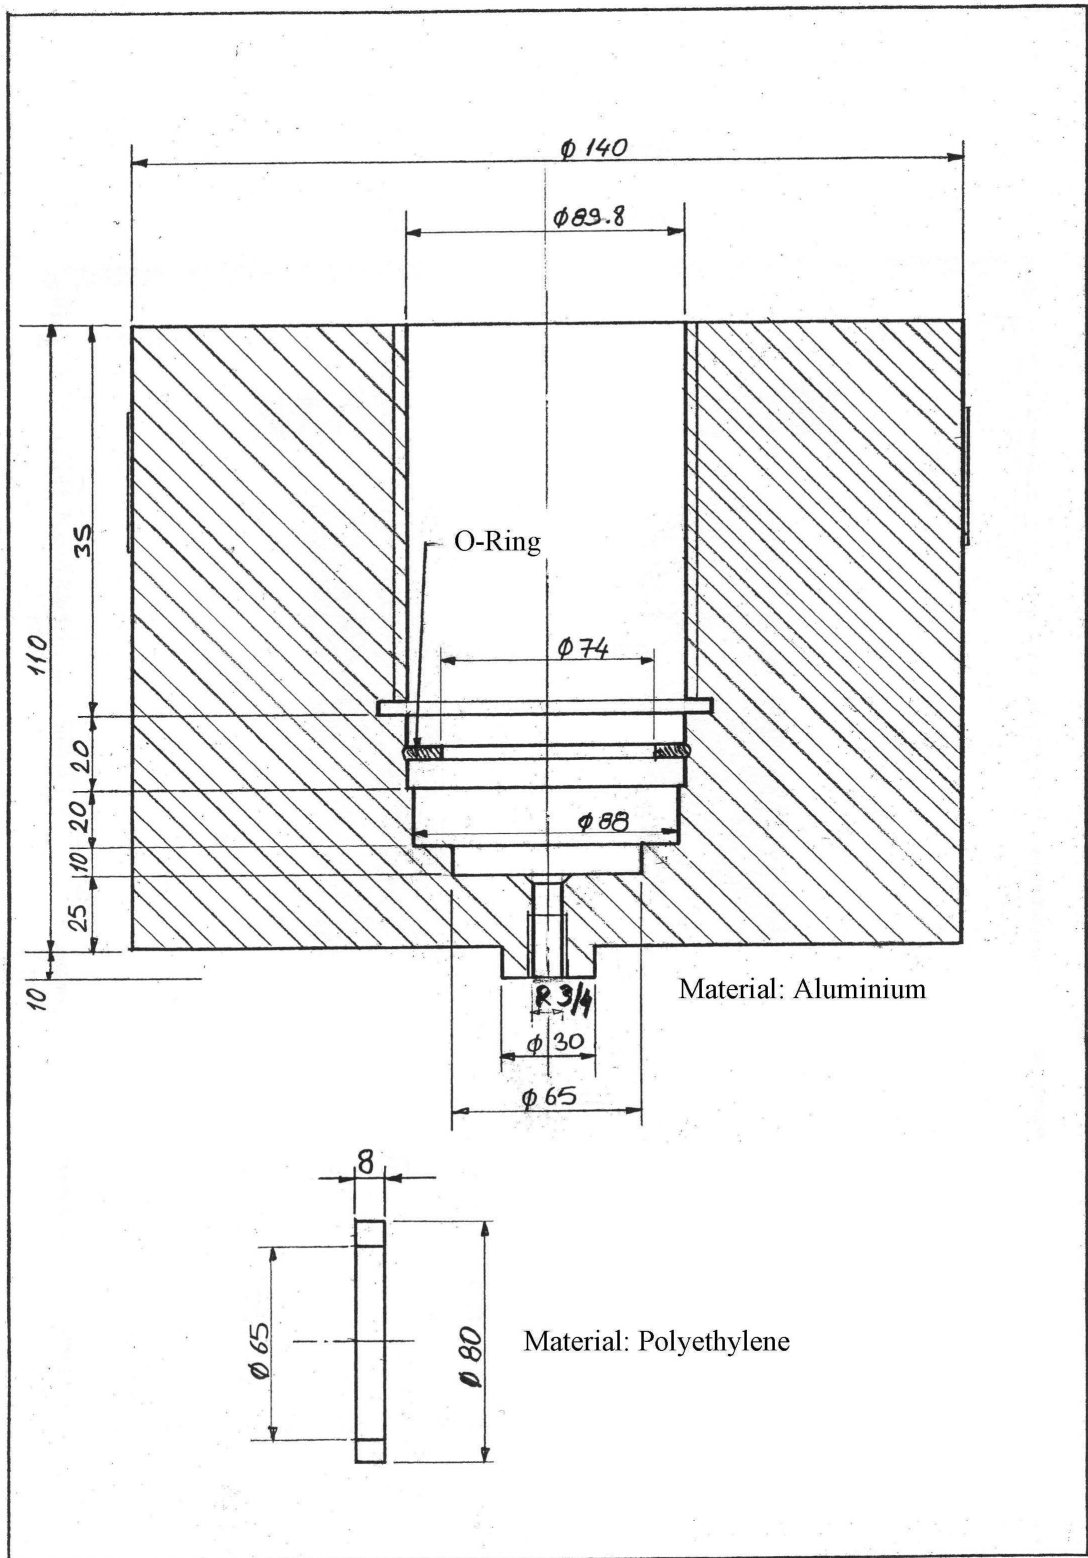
Technical drawing of bottom case for pressure slip cast set-up
